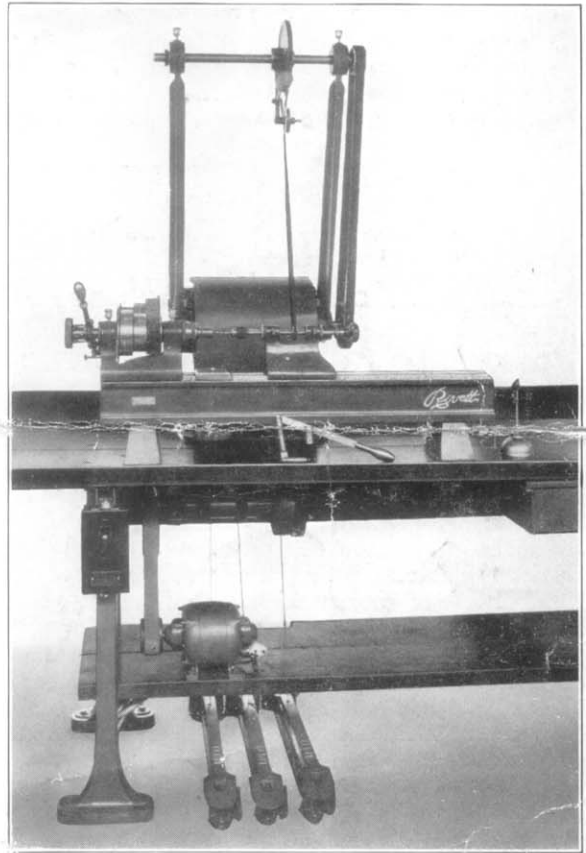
Rivett Series 505 lathe on bench with Horizontal Safety Drive Countershaft, Grinding Countershaft Attachment, ball-bearing, and Latch Treadles. Weight of this grinding attachment countershaft 68 lbs.
